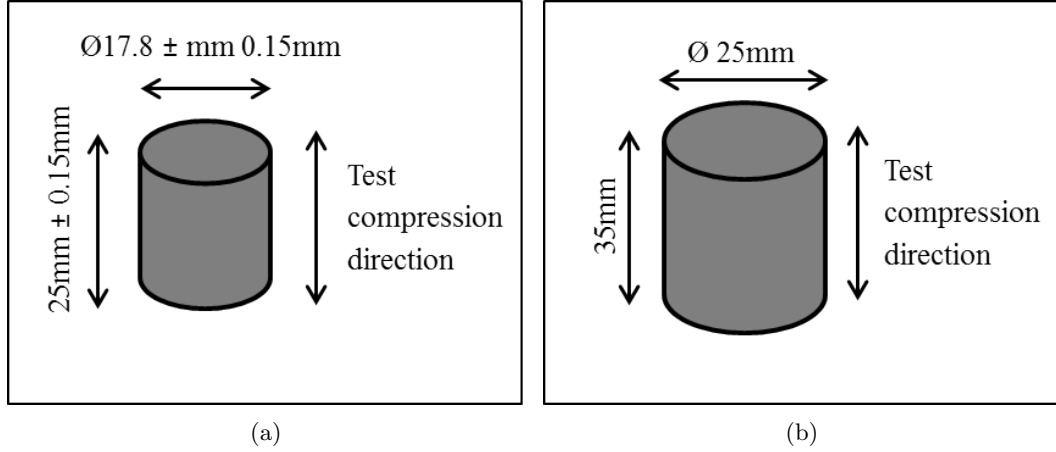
ISO 7743 test piece B dimensions (not to scale) (a) dimensions and tolerances as specified in standard; (b) target dimensions scaled to accommodate the 25mm diameter polymer cord.
